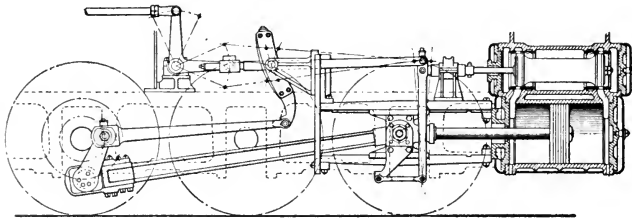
Walschaert Gearing Mounted on a Consolidation Locomotive.
